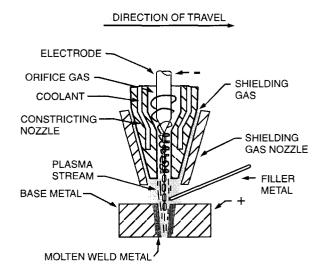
Plasma Arc Welding (Keyhole Mode)
